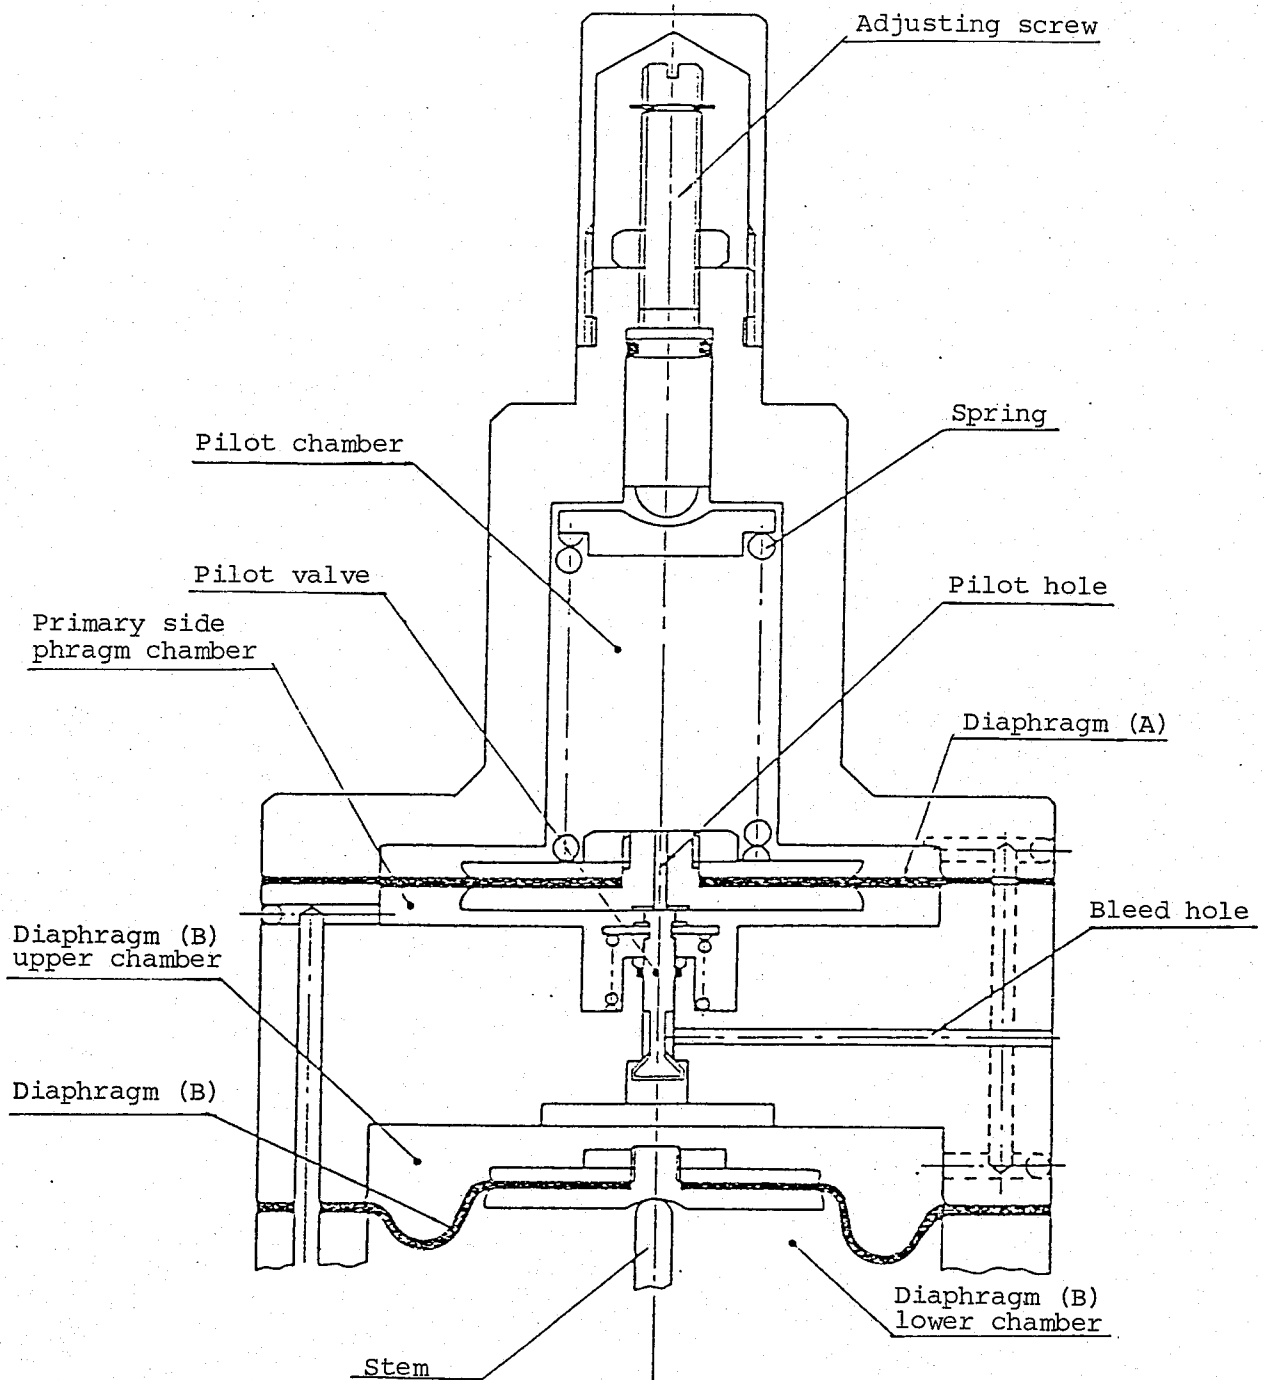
Sectional View of Differential Pressure Regulating Valve
